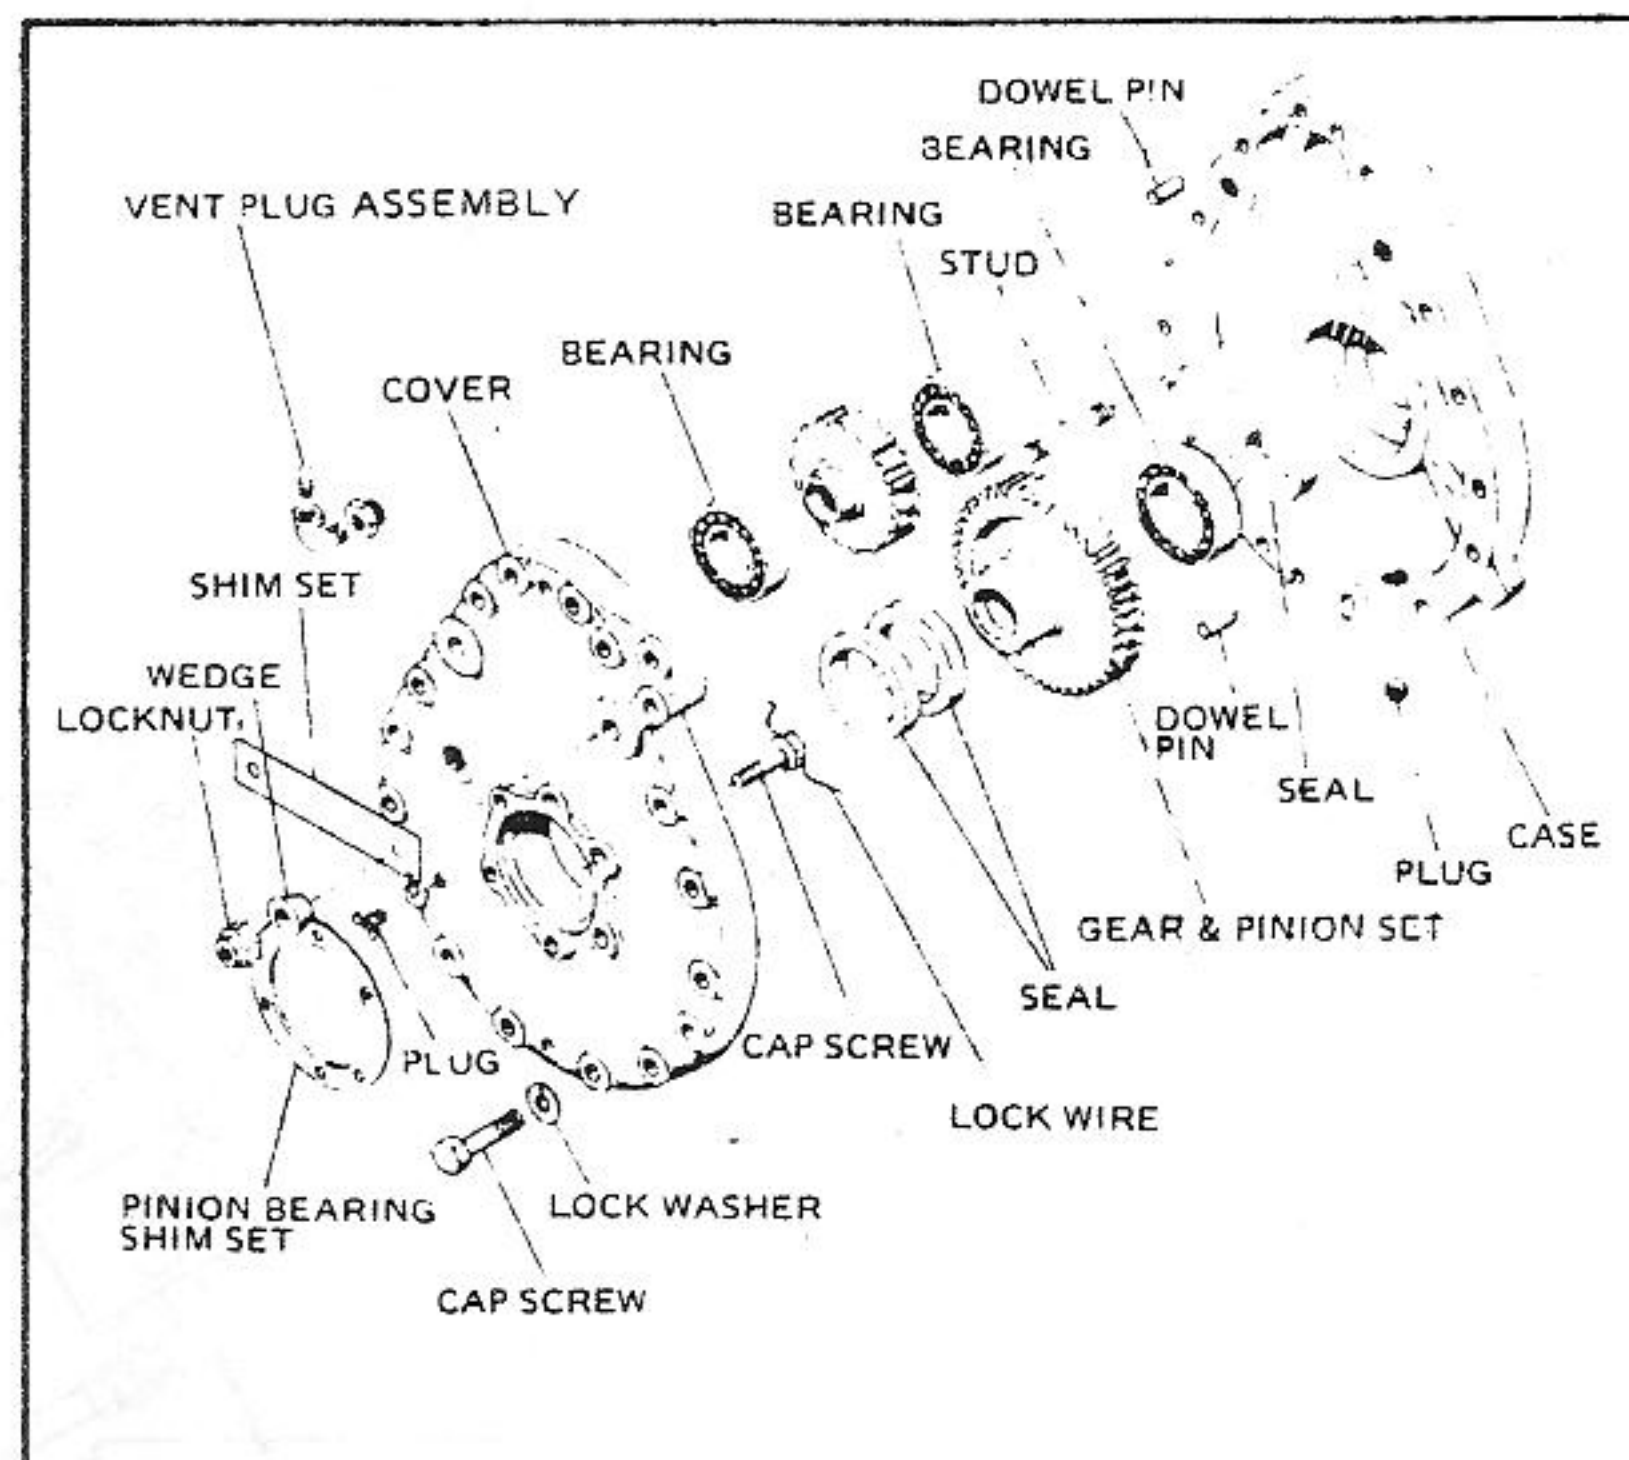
9. TRANSFER CASE, EXPLODED VIEW
